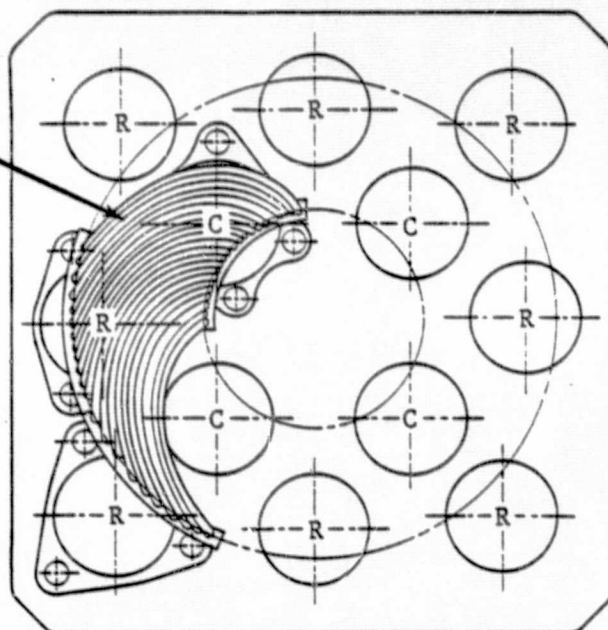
CURRENT ENVOLUTE HEAT HEAD LAYOUT FOR P-40/P-75 STIRLING ENGINES
